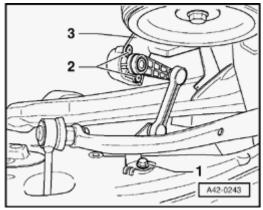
Removing/Installing Bolts With Angled Wrench Courtesy of VOLKSWAGEN UNITED STATES, INC.
